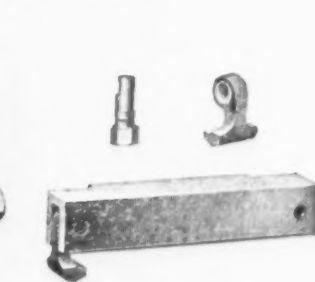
Jaw with One Cam-Bolt and Hook Removed.
